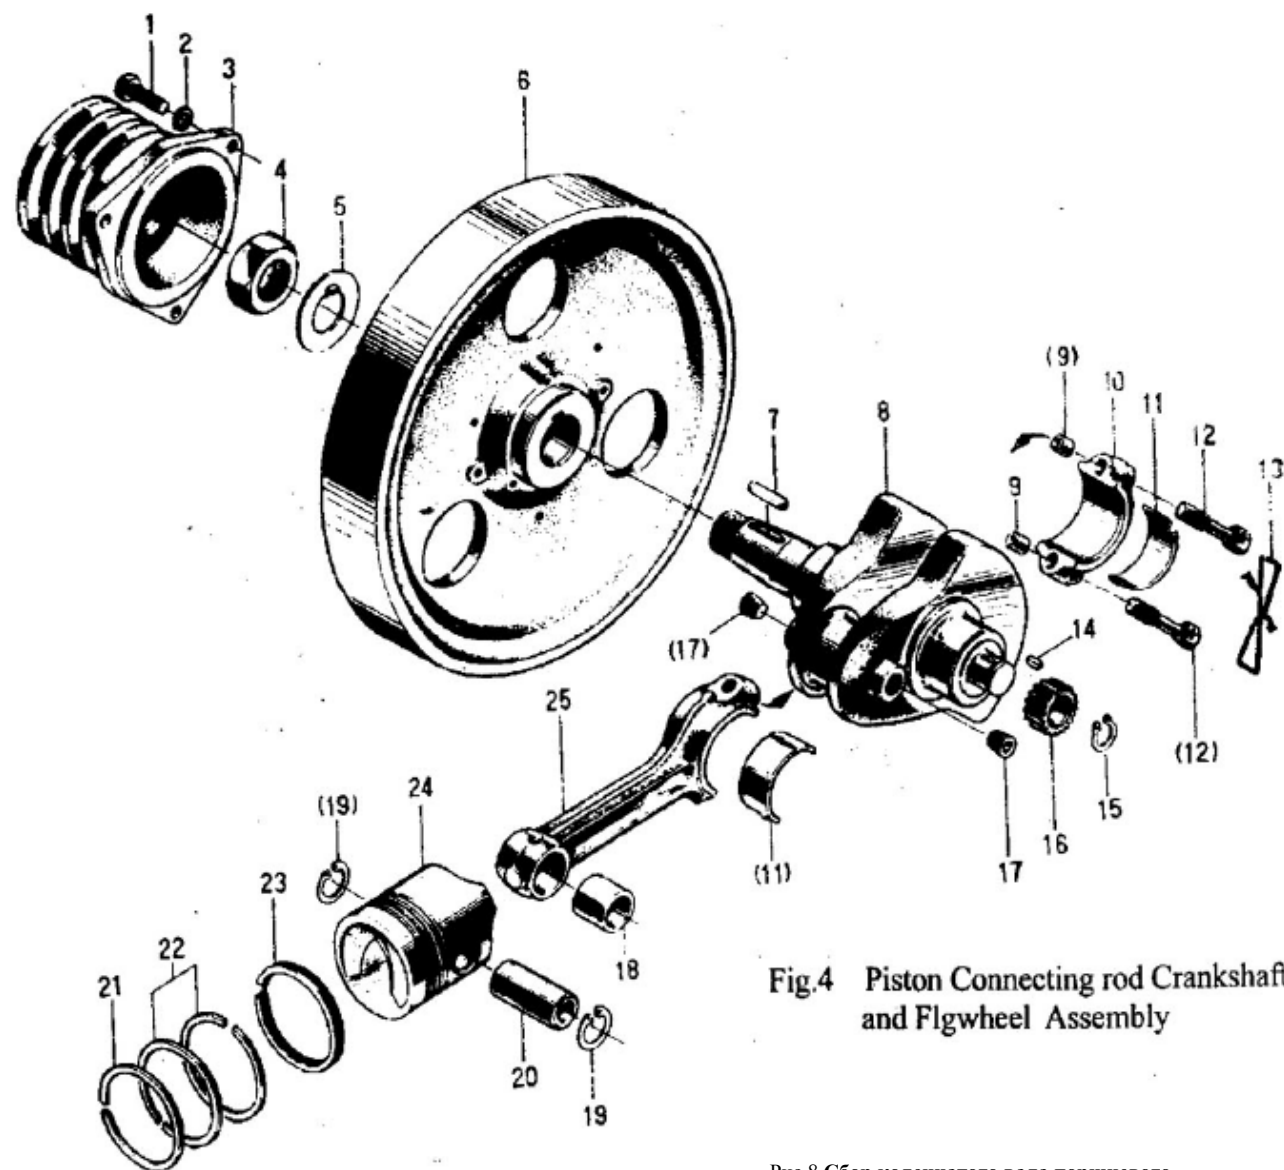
Piston Connecting rod Crankshaft and Flywheel Assembly
